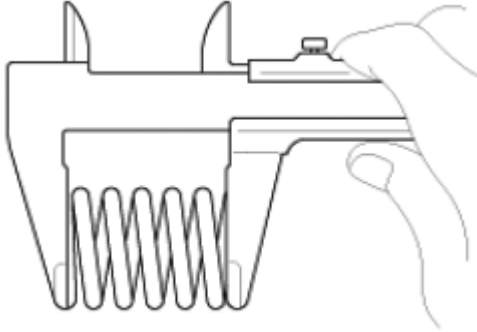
Measuring Free Length Of Valve Spring Using Vernier Calipers
